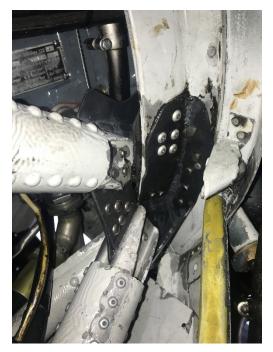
Remanufactured and assembled plate. Photograph provided by Ju-Air.
